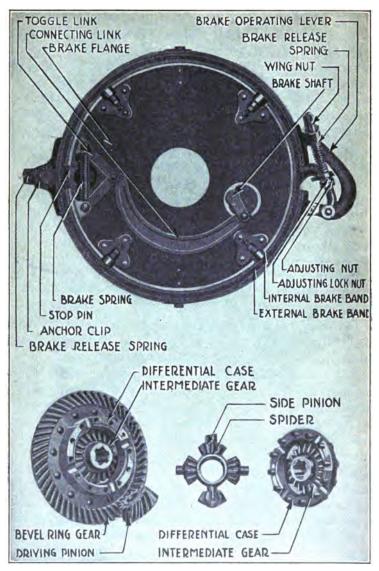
At Top, Brake Assembly of Buick Automobile, Showing Relation of Internal Expanding and External Contracting Band Brakes. At Bottom, the Spiral Bevel Driving Gears and Differential Parts are Shown.
